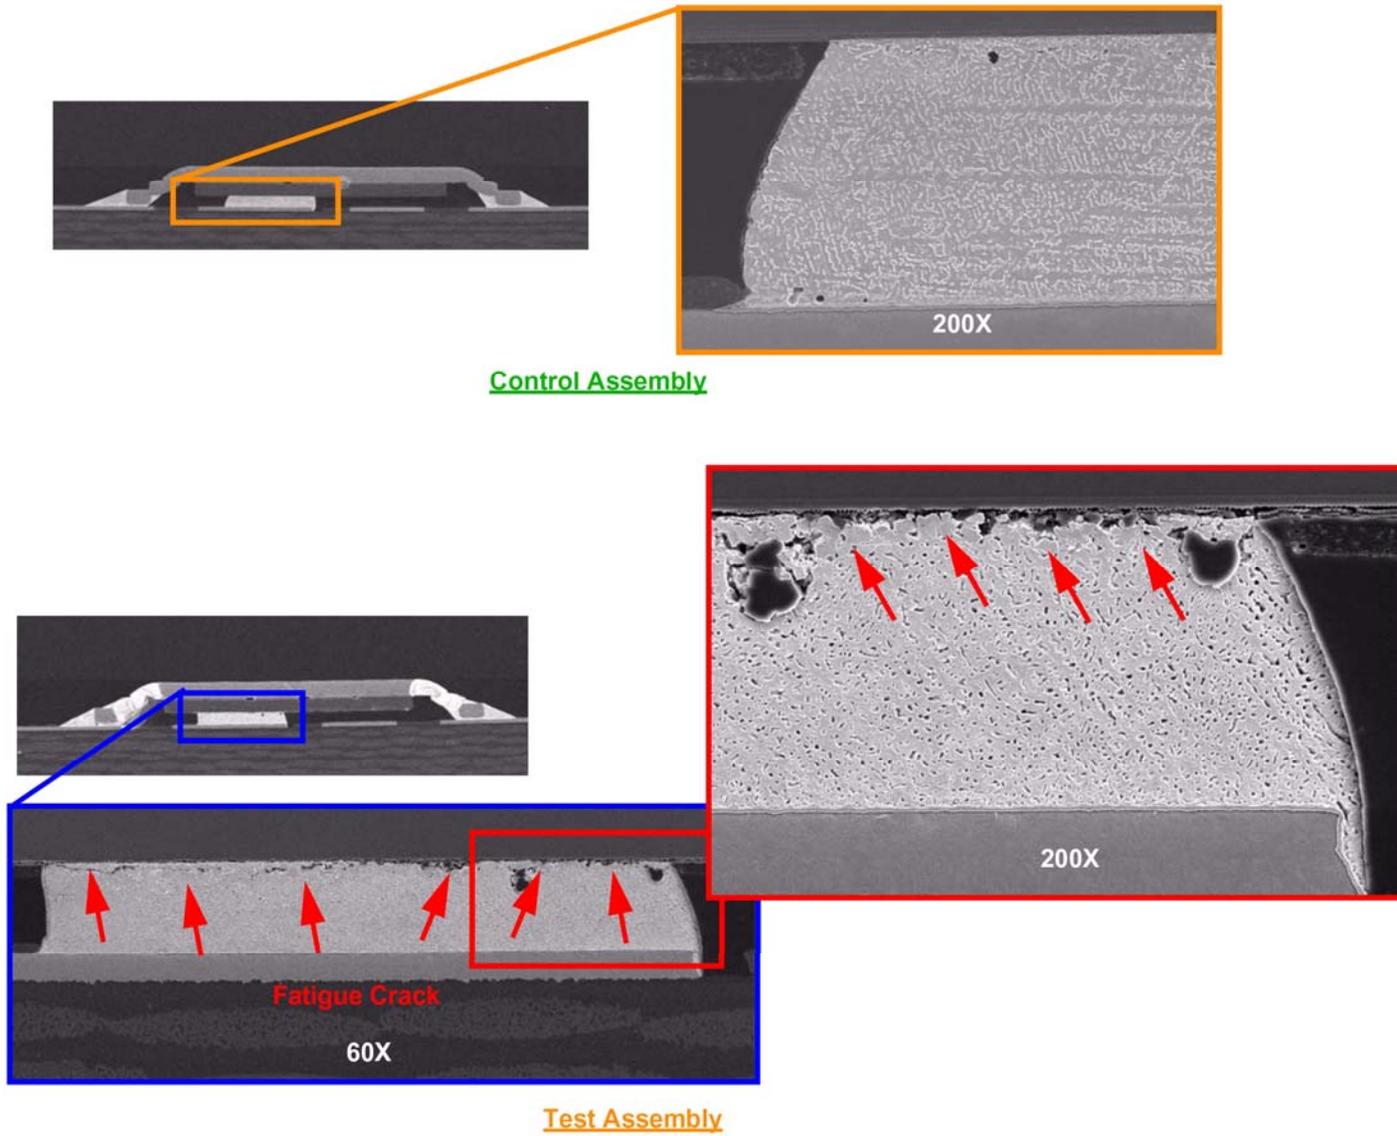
Cross-Sectional Analysis: IRF6644 Version 1 Lead-Tin Eutectic Solder
